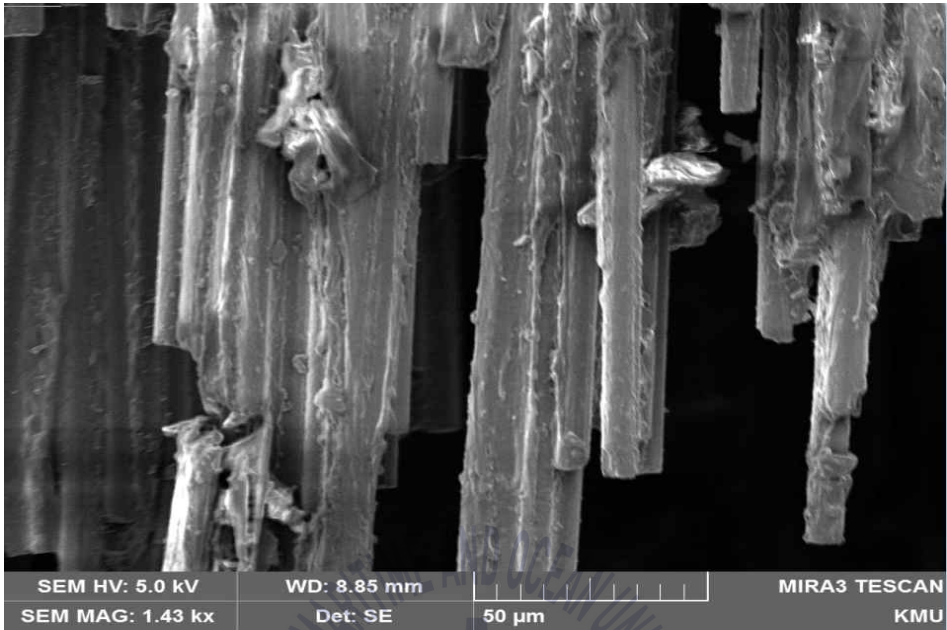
Fracture surface of 200°C mold specimen (longitudinal tensile)
